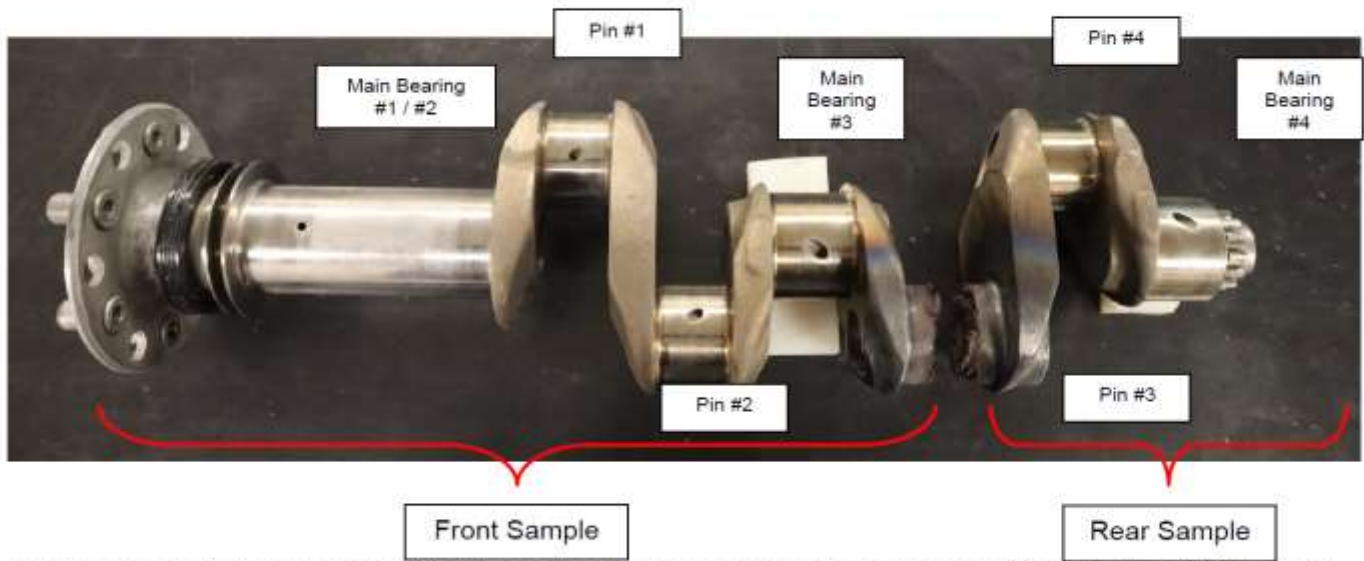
Fractured crankshaft in the as-received condition.
